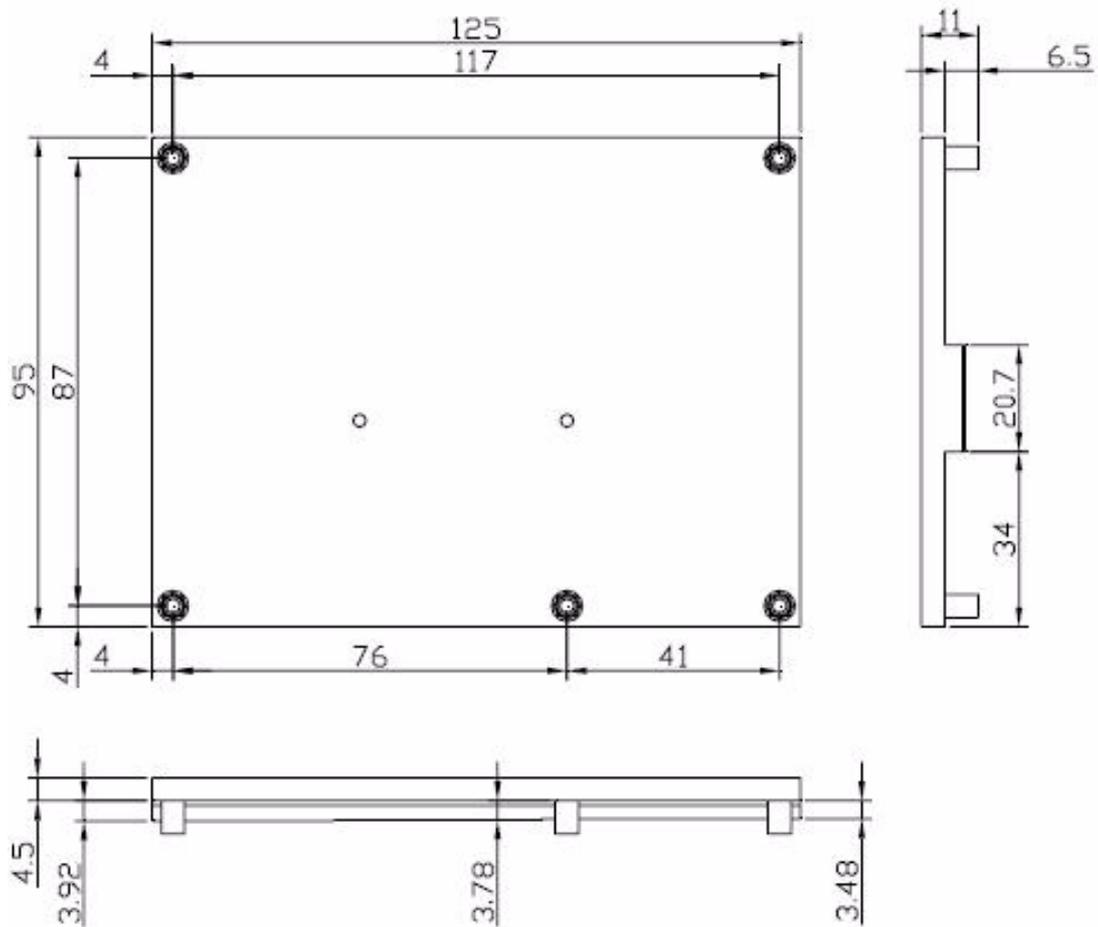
Heatspreader Drawing of BGA Type CPU
